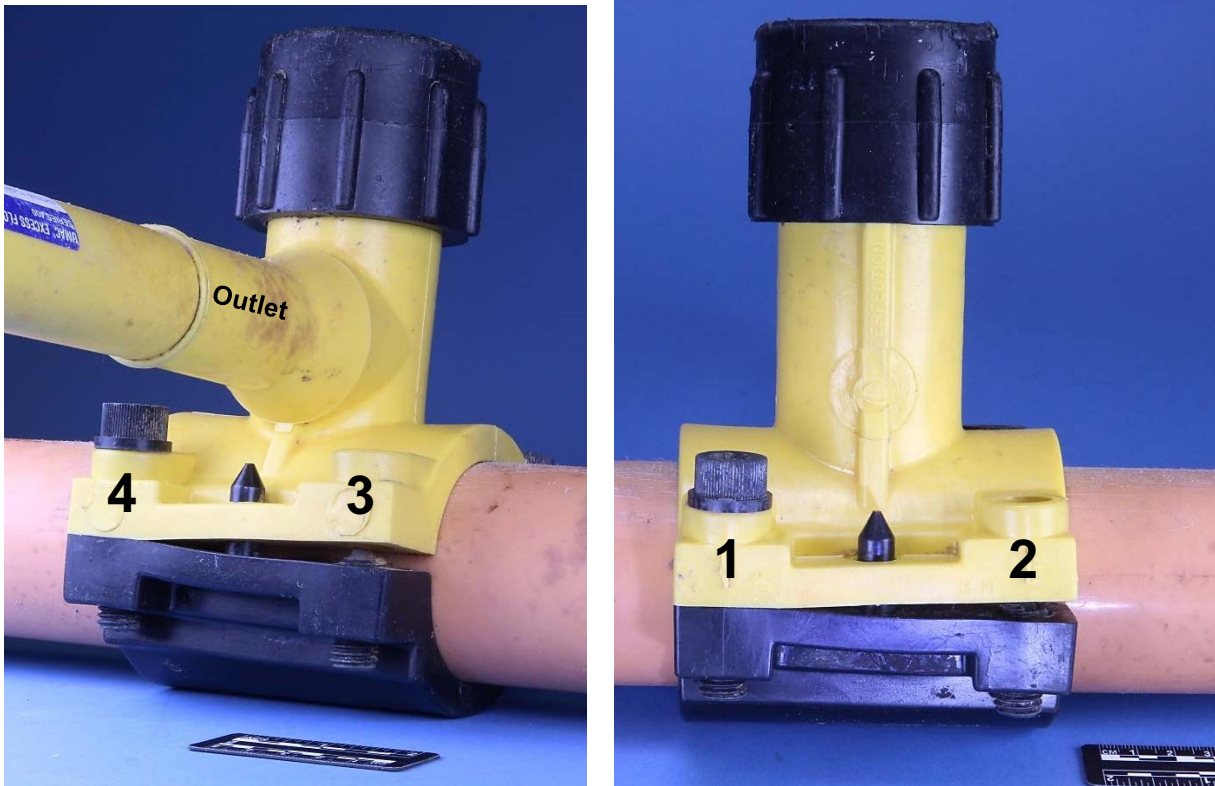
Other views of the tee assembly showing fractured bolts "2" and "3".
